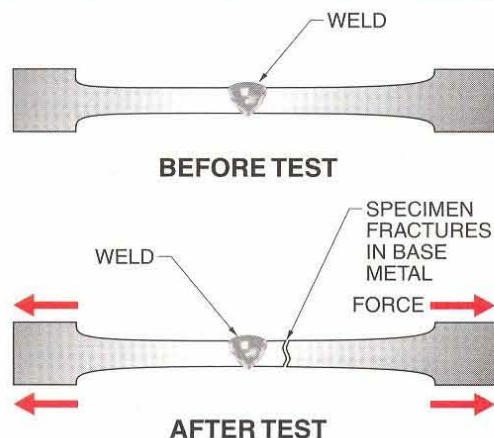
Weld mechanical test samples should fail in the base metal.
